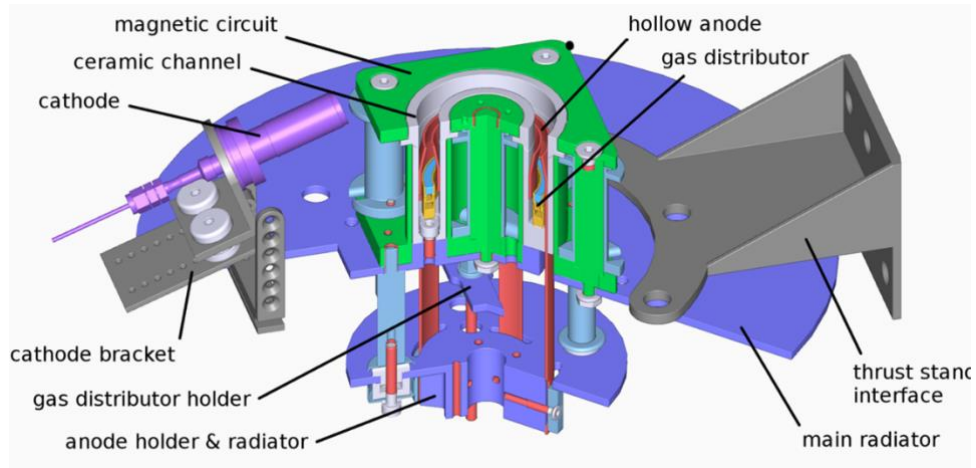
HIKHET final version cross-section: coil spools are shown without windings
